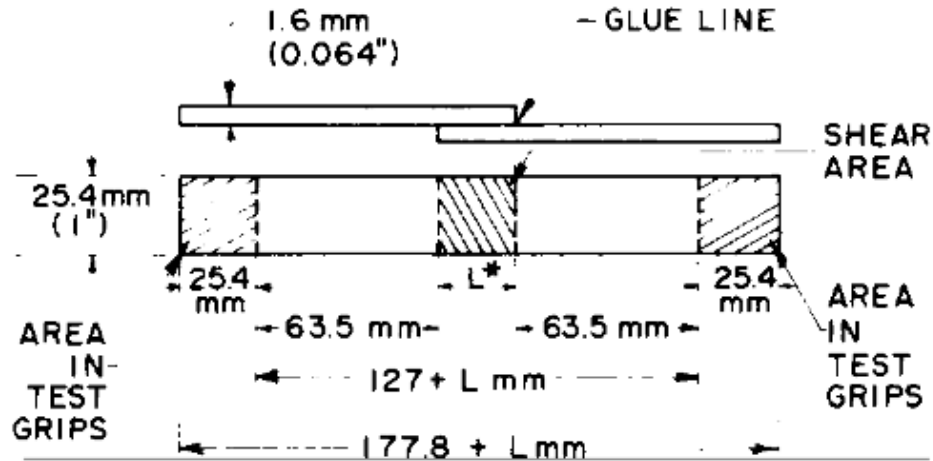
Suggested form and dimensions of test specimen in ASTM D1002
